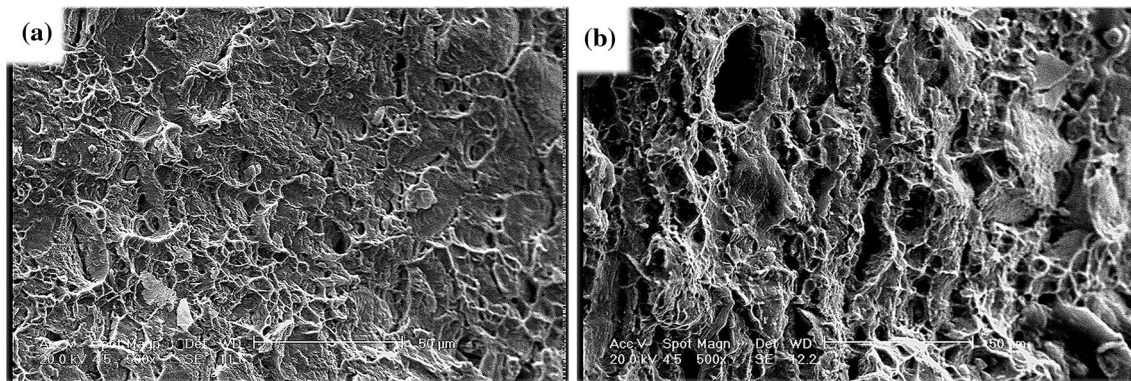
SEM image of the fracture surface of (a) the BM specimen, (b) the welded specimen
